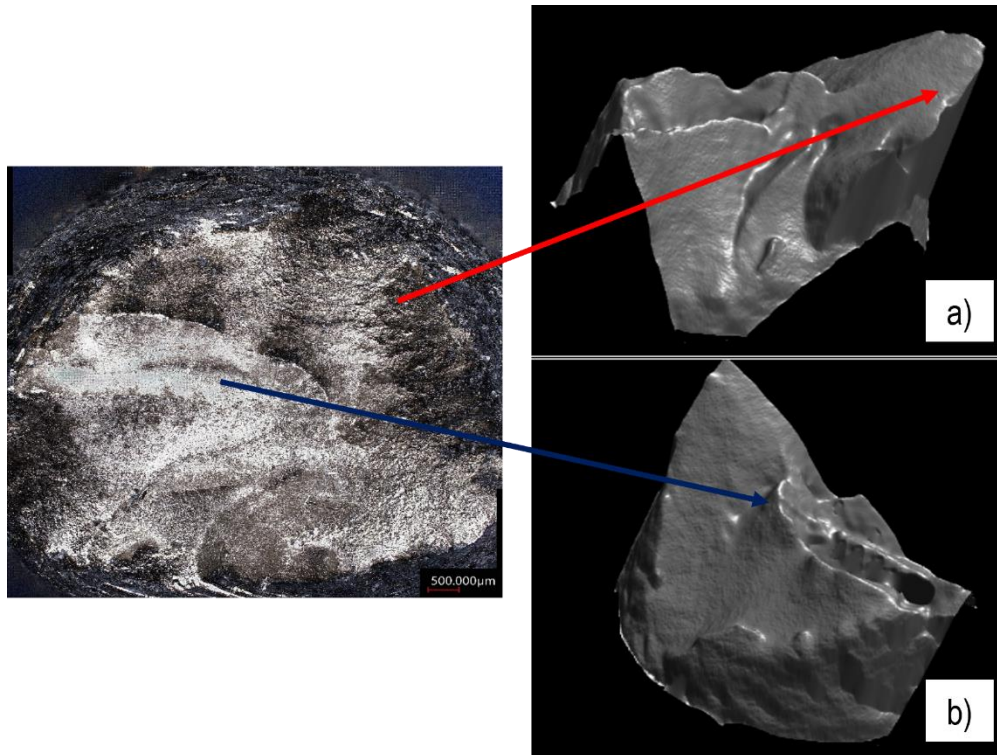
The fracture surface of the X 6061-AD #2-1 has a large ridge (red arrow) and ridges throughout the surface (blue arrow). The 3D the topography of the fracture surface as viewed from the top (a) and bottom (b) side
